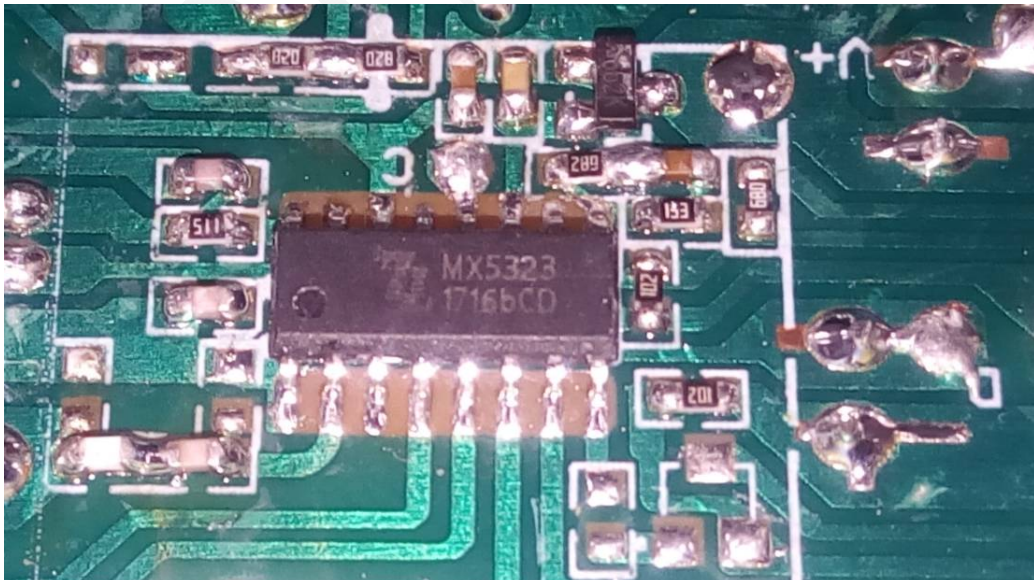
EXHIBIT C - TEST SETUP PHOTOGRAPHS
